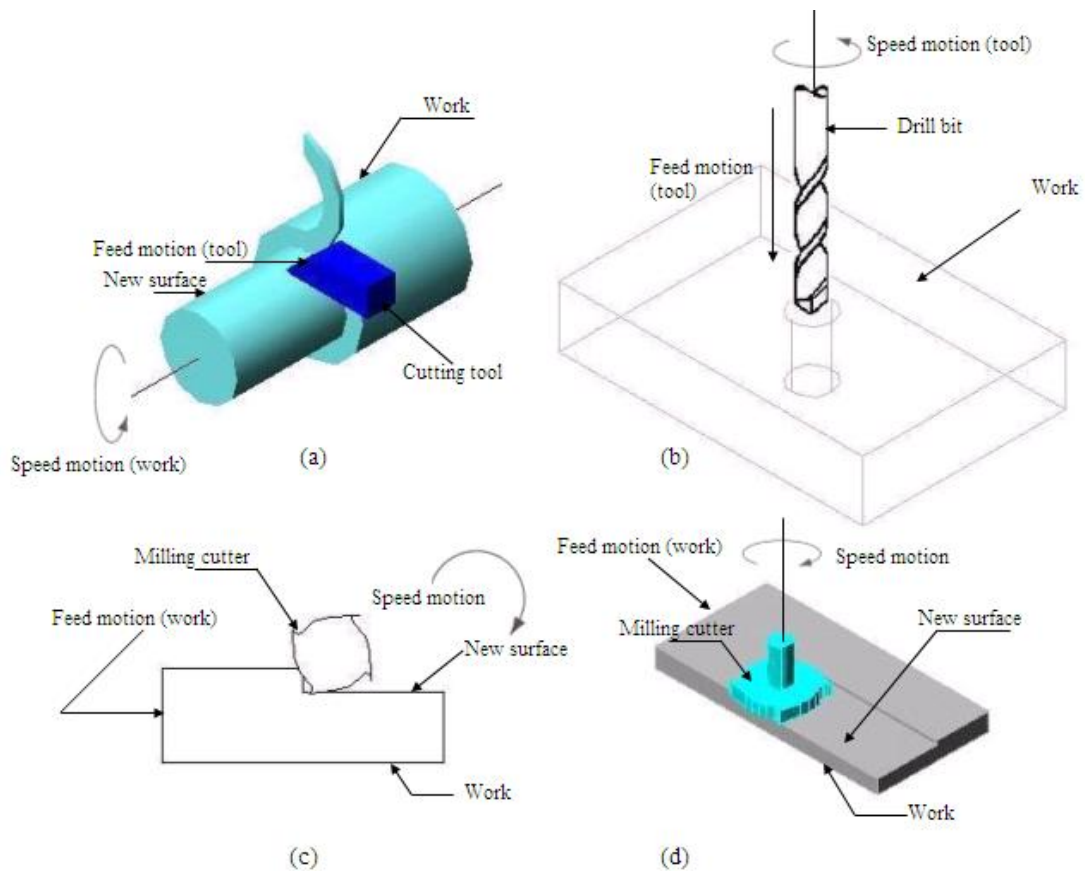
The three most common types of machining process: a) turning, b) drilling and two forms of milling, c) peripheral milling and d) face milling.
